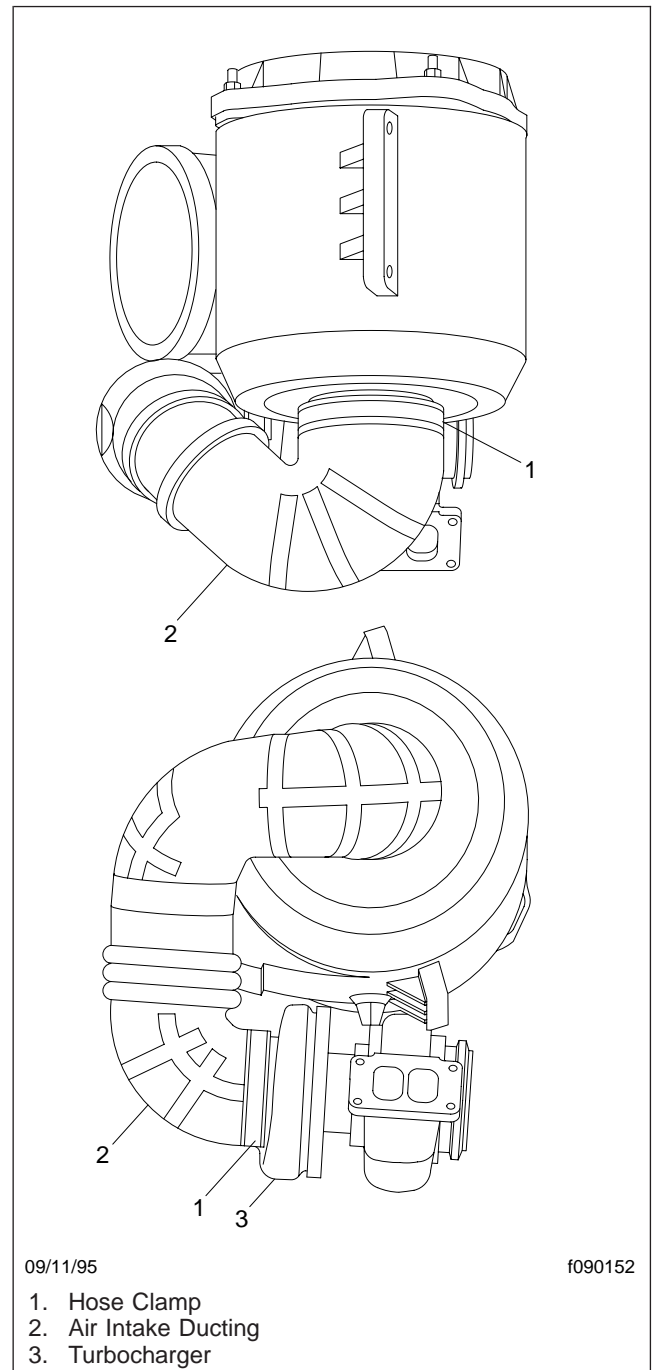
, Air Intake Ducting With Detroit Diesel Series 60 Engine
